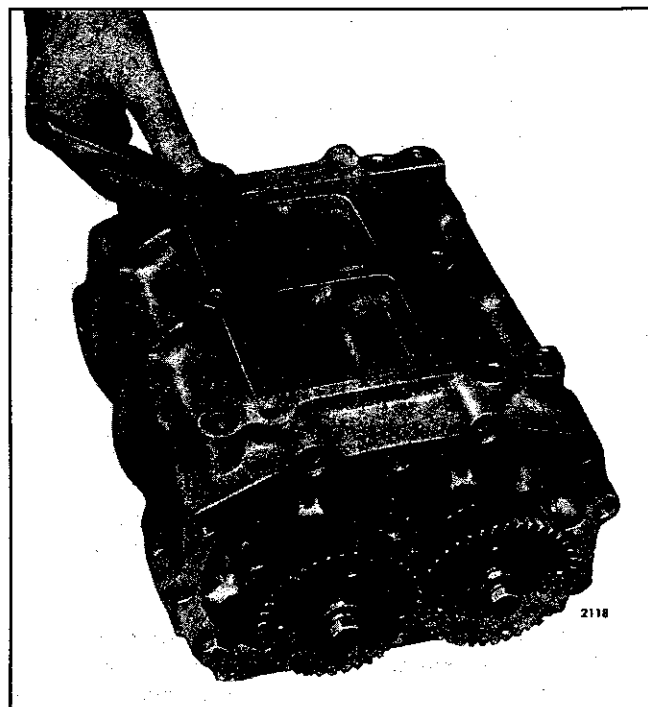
Measuring Rotor Lobe to Housing Clearance
